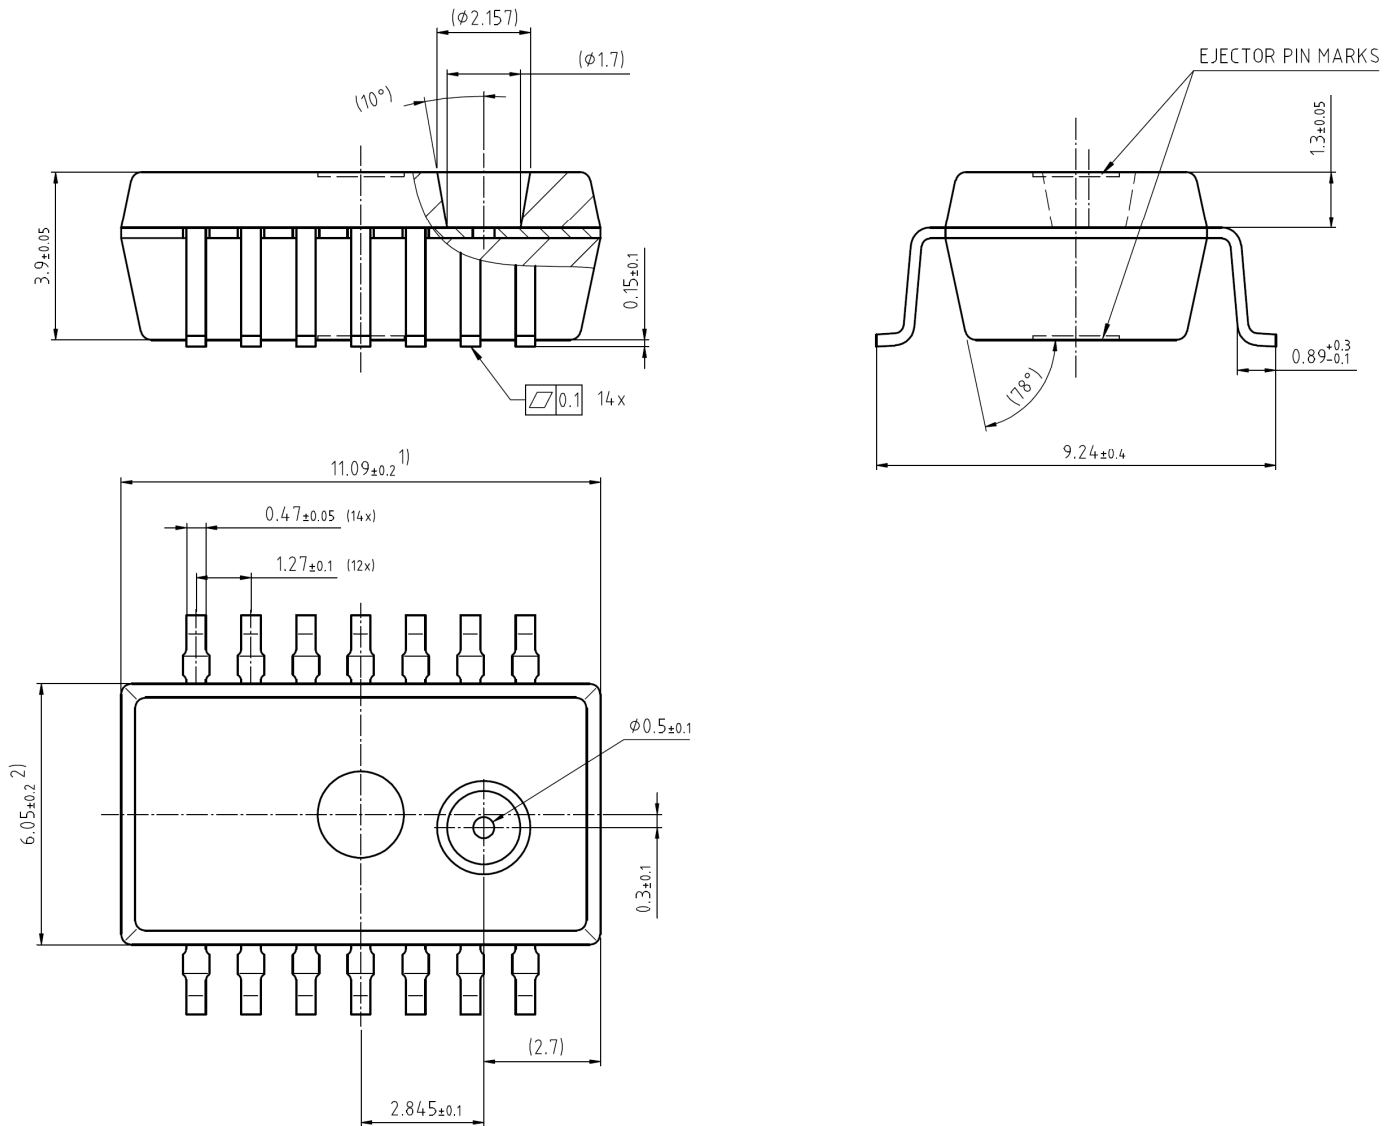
Physical Dimensions – Drawing P-DSOSP-14-6 1) Dimension does not include mold flash, protrusions or gate burrs. Mold flash, protrusions and gate burrs do not exceed 0.15mm (0.006 inch) per side. 2) Dimension does not include inter-lead flash or protrusions. Inter-lead flash and protrusions do not exceed 0.25mm (0.010 inch) per side.
